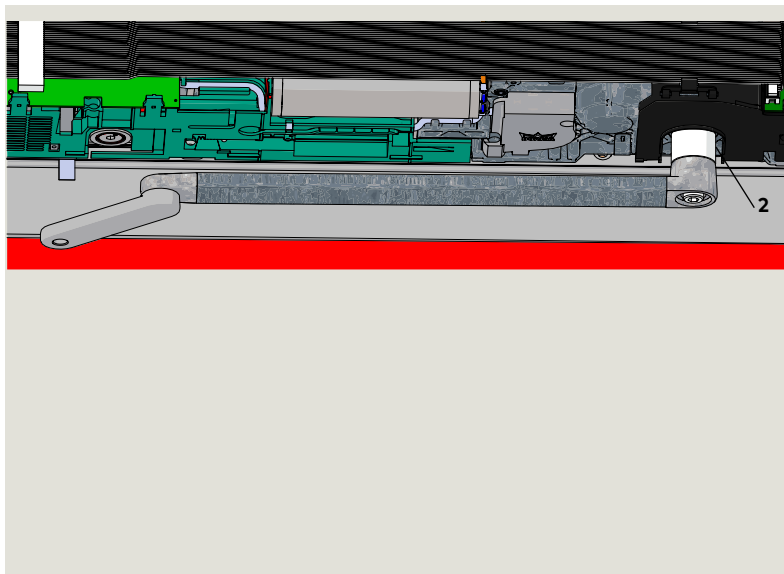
Install drive arm and extension onto ED100LE spindle
